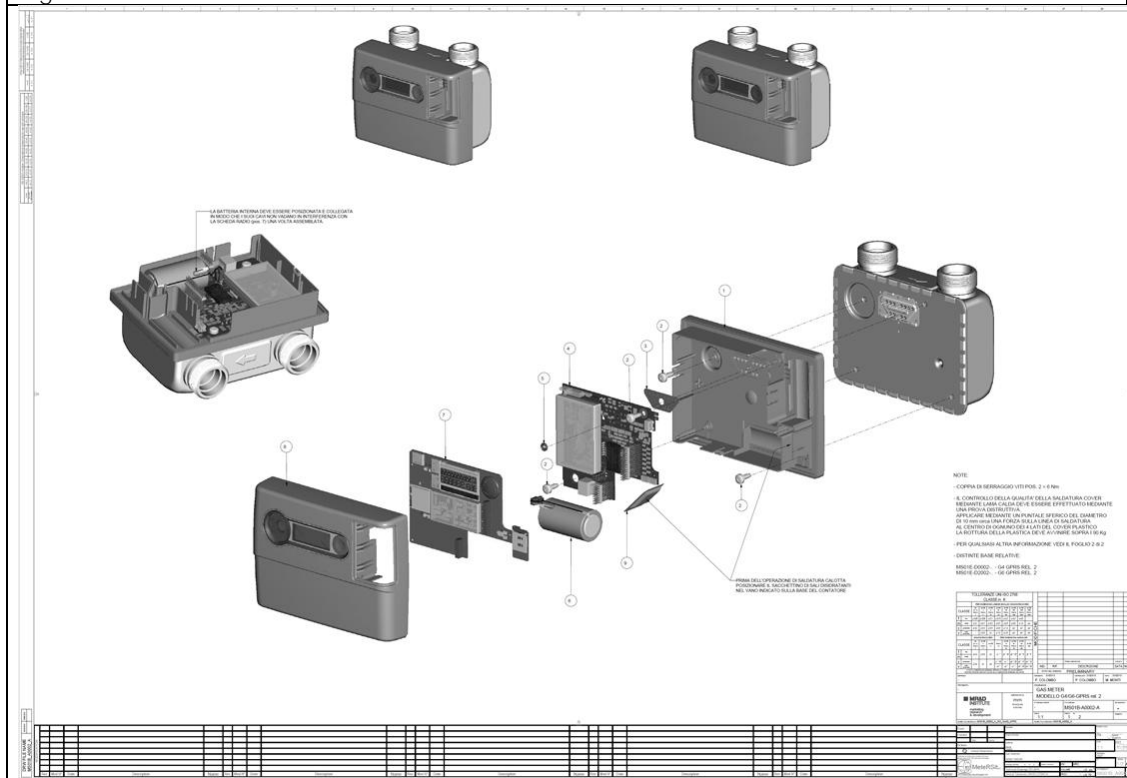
VIEW OF ASSEMBLY AND SUB-ASSEMBLY - RF WMBUS
